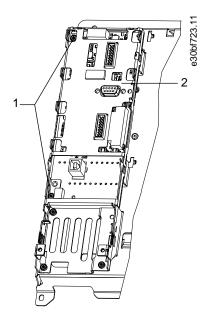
Location of Cable Shield, Screws, and MCB 159 Ribbon Cable (Control Card with MCB 159)
